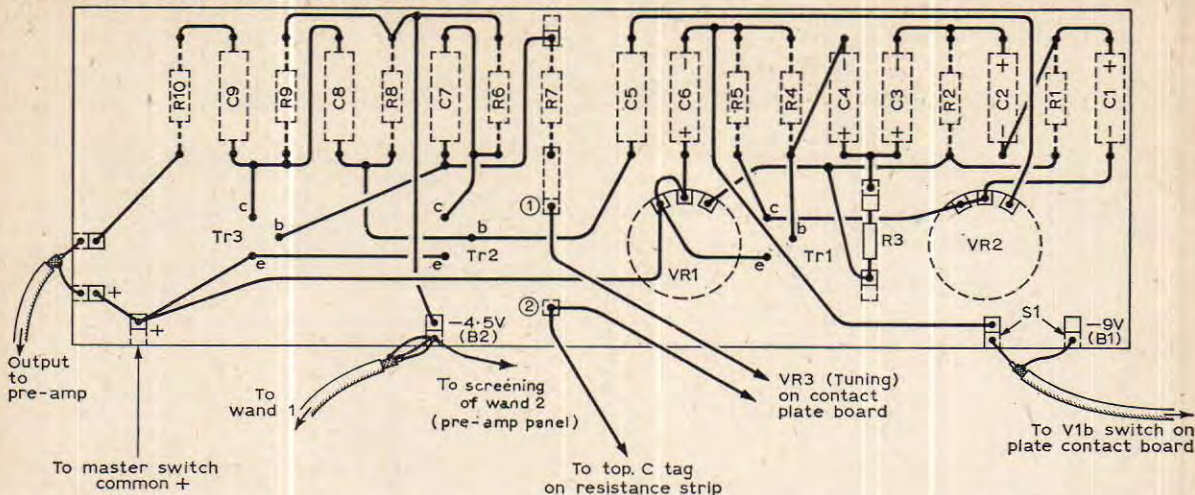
Circuit board layout for the vibrato oscillator and note generator. All components are mounted on the reverse side, to the wiring.
